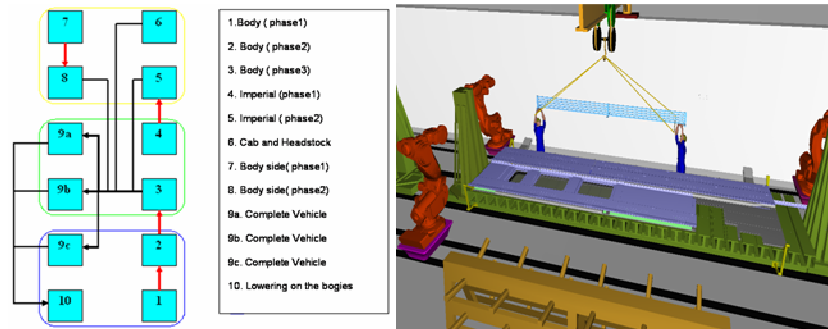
Innovative assembly process of a modular train; on the right the proposed configuration layout; on the left the lowering of the baggage rack in the workplace 7 dedicated to the assembly of the body side module.
